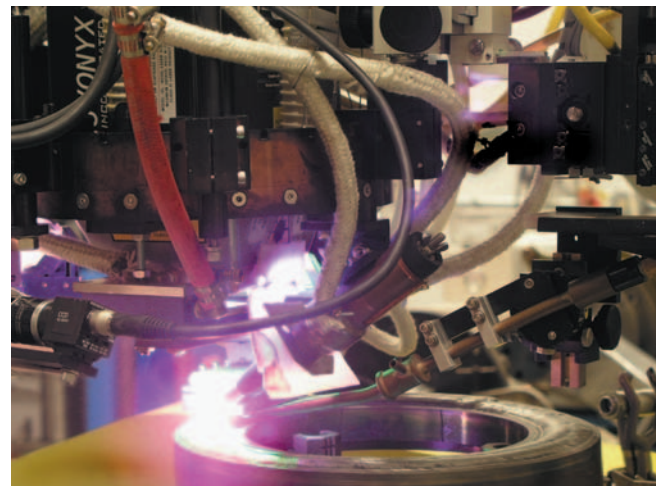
A Laser Deposits Cladding into a Machined Groove in a Ring Being Held by the Universal Fixture.
